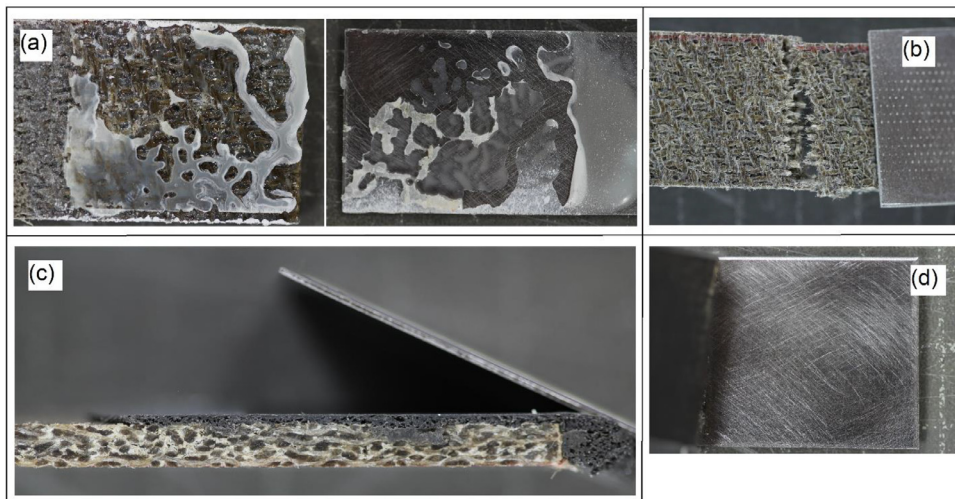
Failure of the steel - flax/epoxy joint with epoxy adhesive (a,b) and rubber (c,d).
